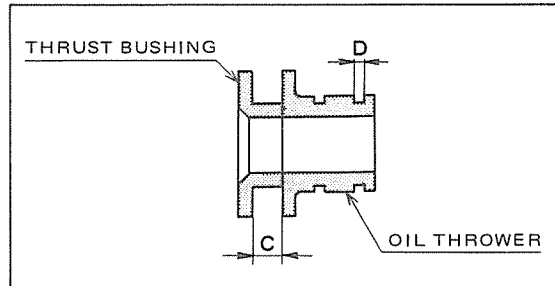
B.133 Measurement of Thrust Bushing and Oil Thrower
